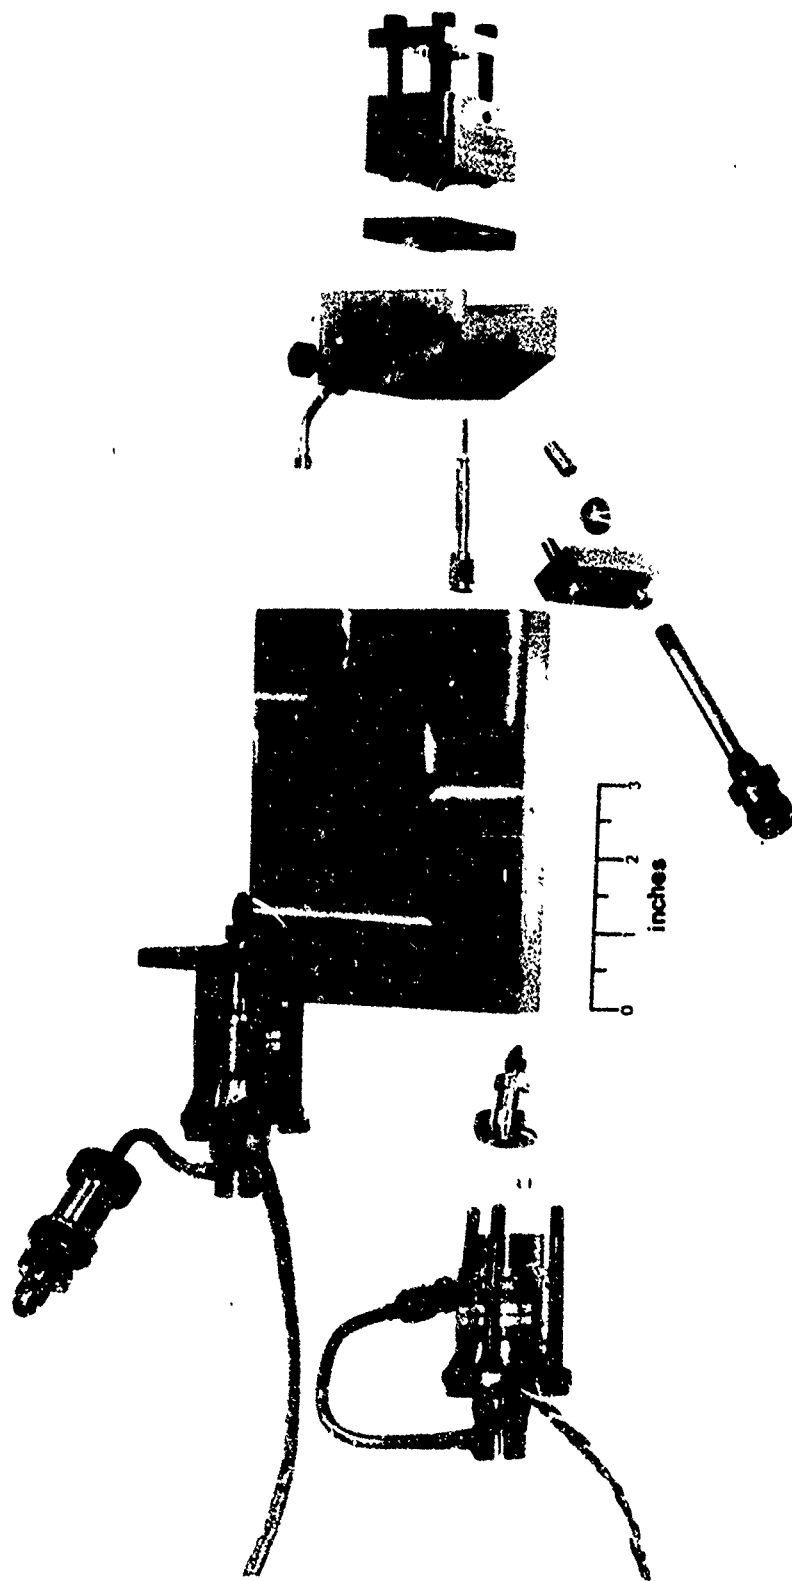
0.1 LB_f THRUSTER (WORKHORSE TYPE - EXPLODED VIEW)
